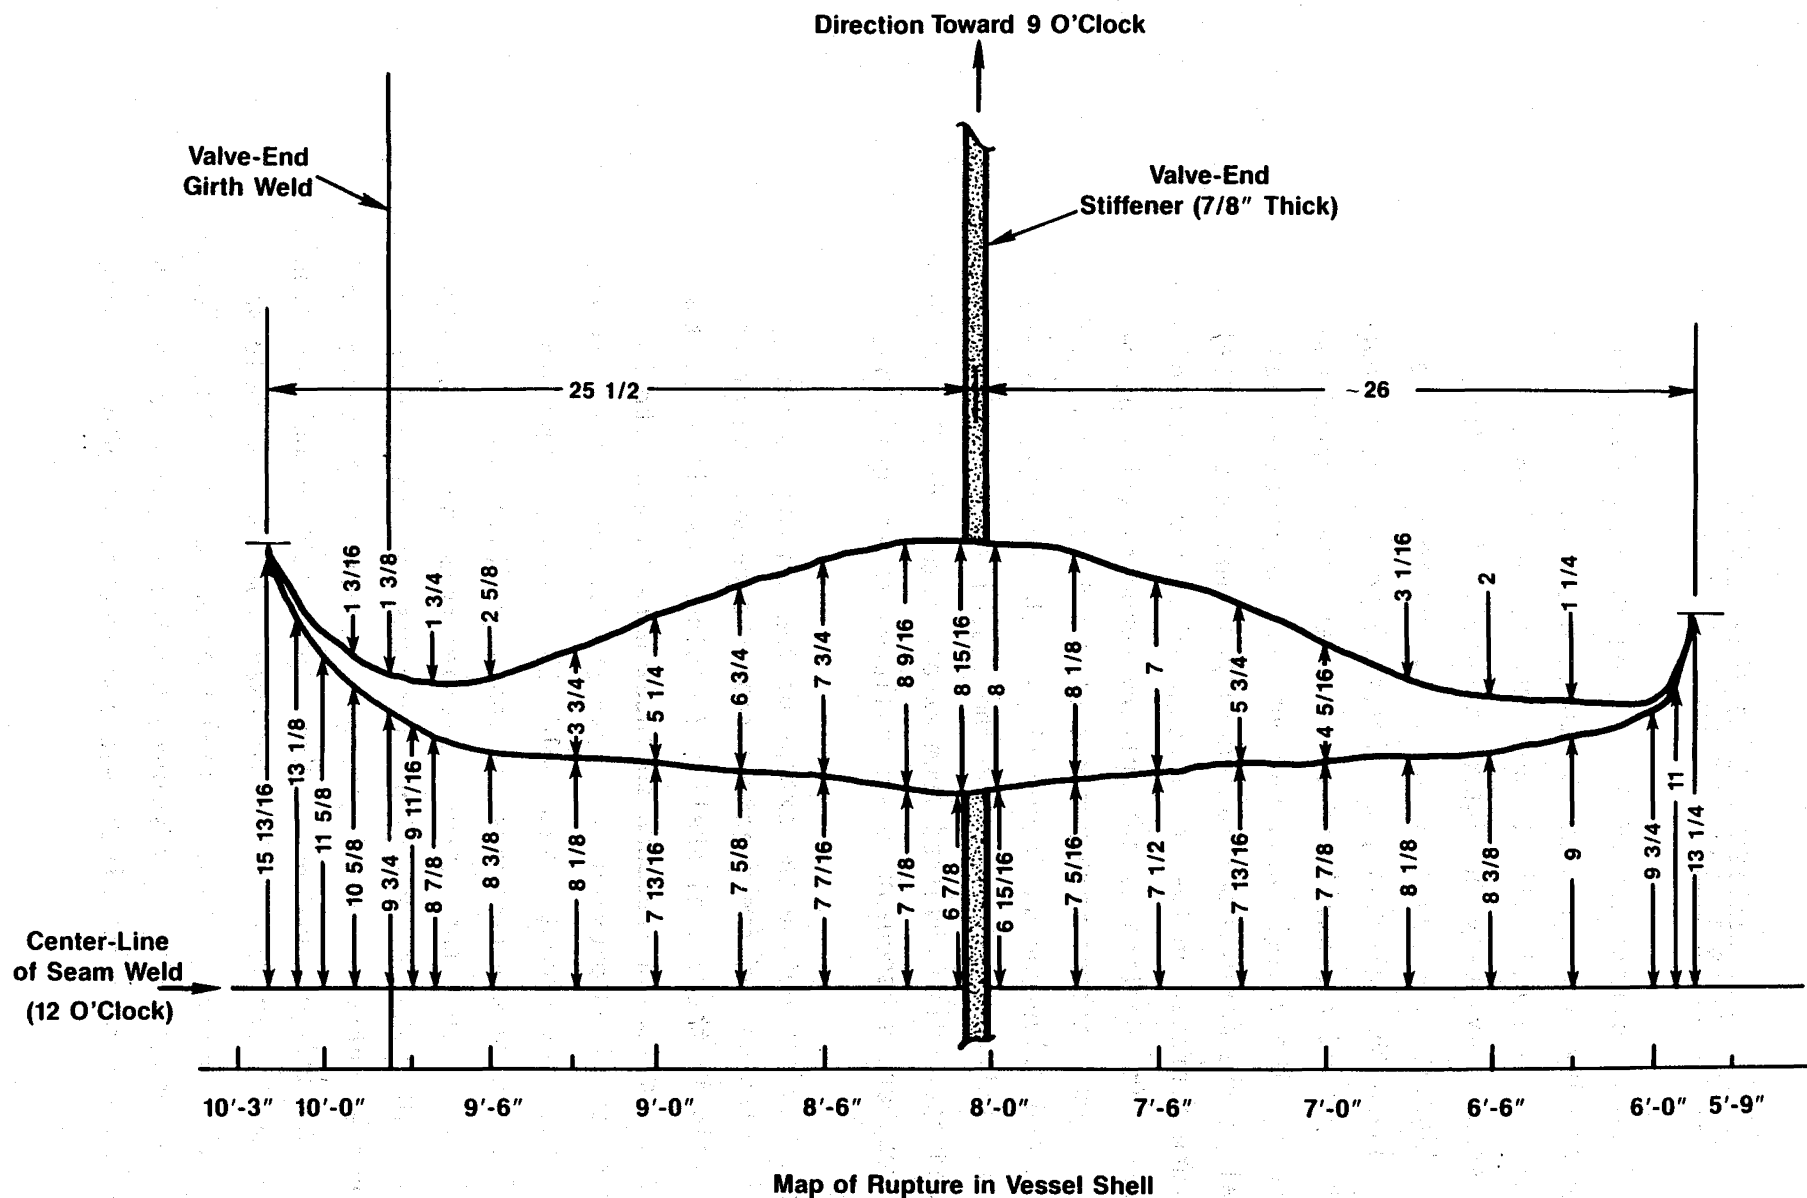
MAP OF RUPTURE IN VESSEL SHELL SHOWING THE LOCATION OF THE RUPTURE AND THE SEPARATION OF THE FRACTURE SURFACES WITH RESPECT TO THE LENGTH MEASUREMENTS, AND THE LONGITUDINAL SEAM WELD
